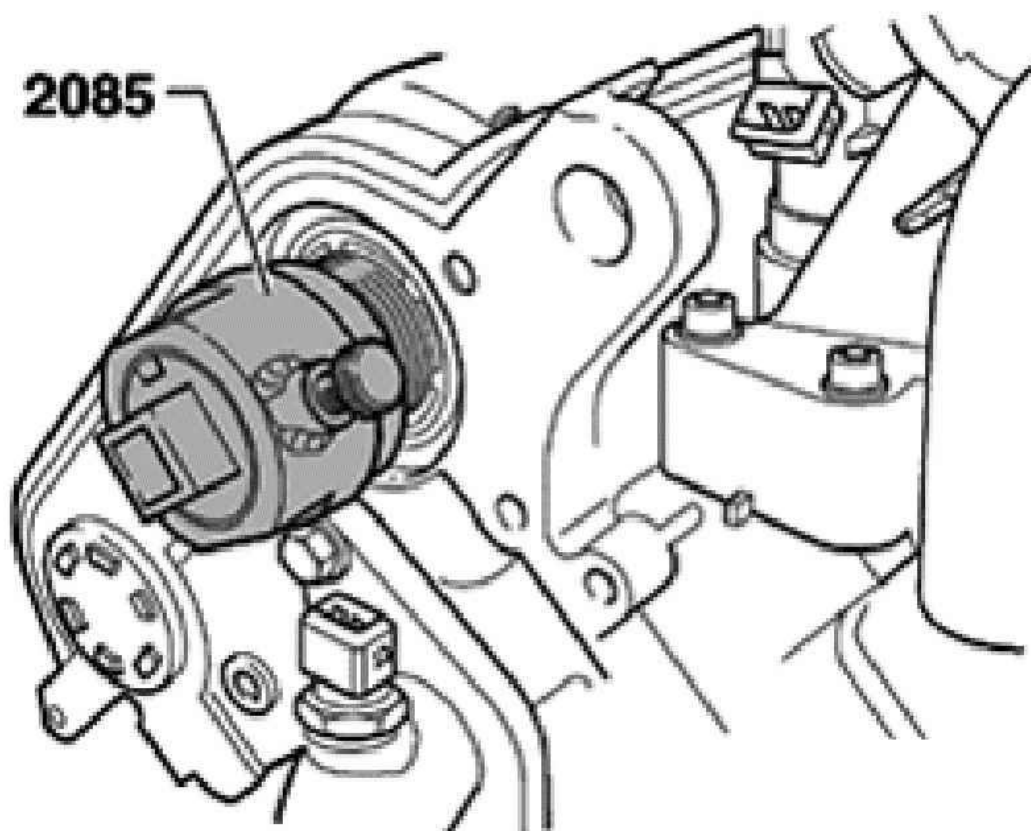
Screwing In Bolt From 2085/1 Oil Ring Extractor - Oil Seal At Hall Sensor (Left Cylinder Head)
